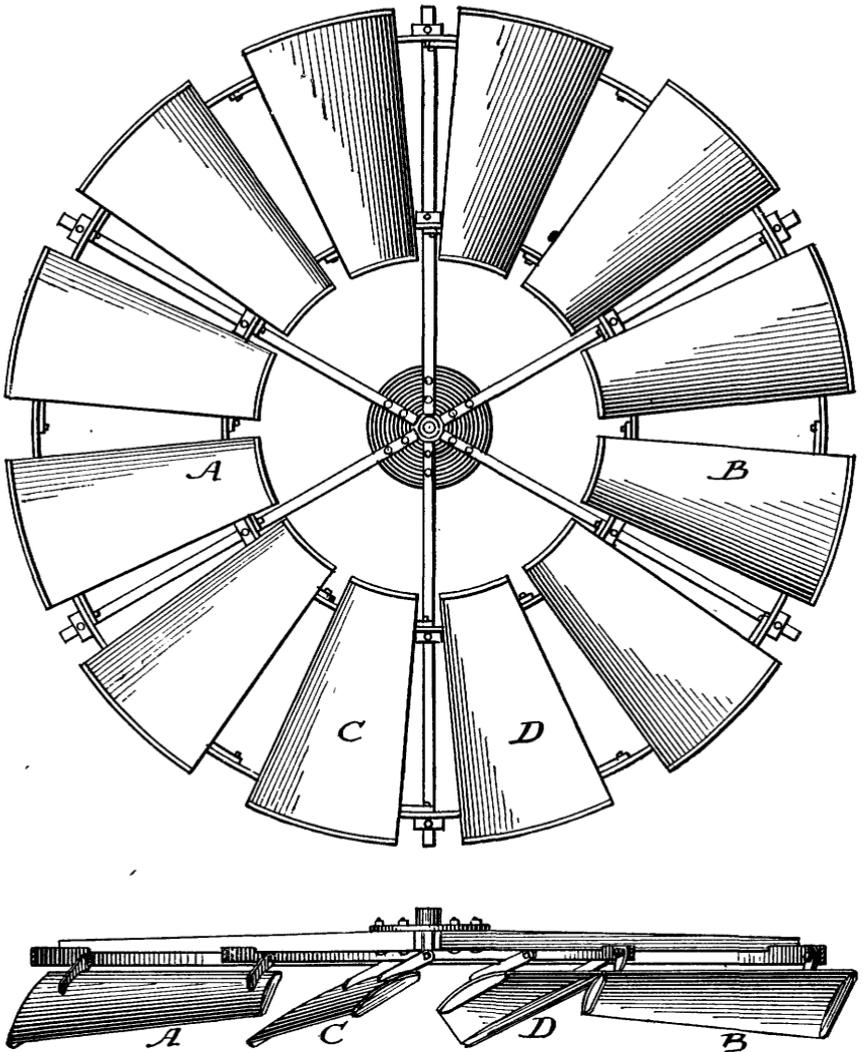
Elevation and section of wheel No. 44. (Sail area, 13,590 square feet; efficiency, 0.213.)
